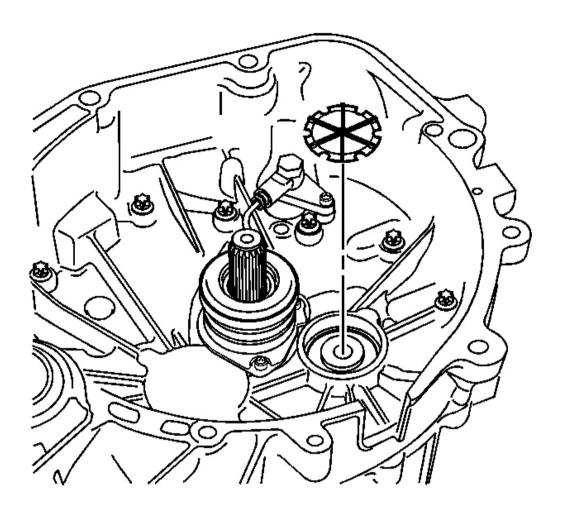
Identifying Plastic Oil Guide Courtesy of GENERAL MOTORS CORP.
